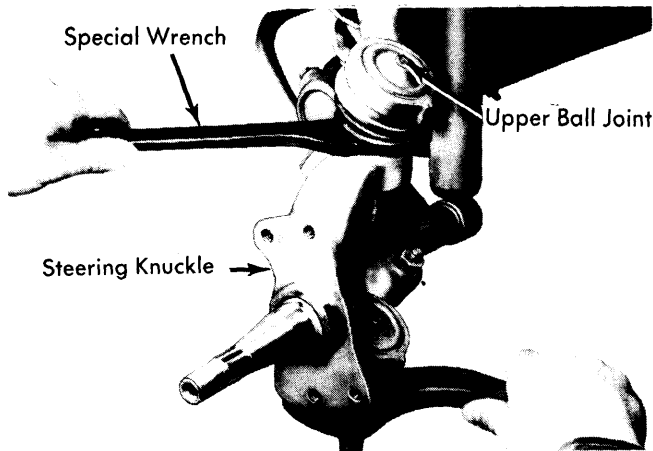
Removing Upper Ball Joint from Steering Knuckle
